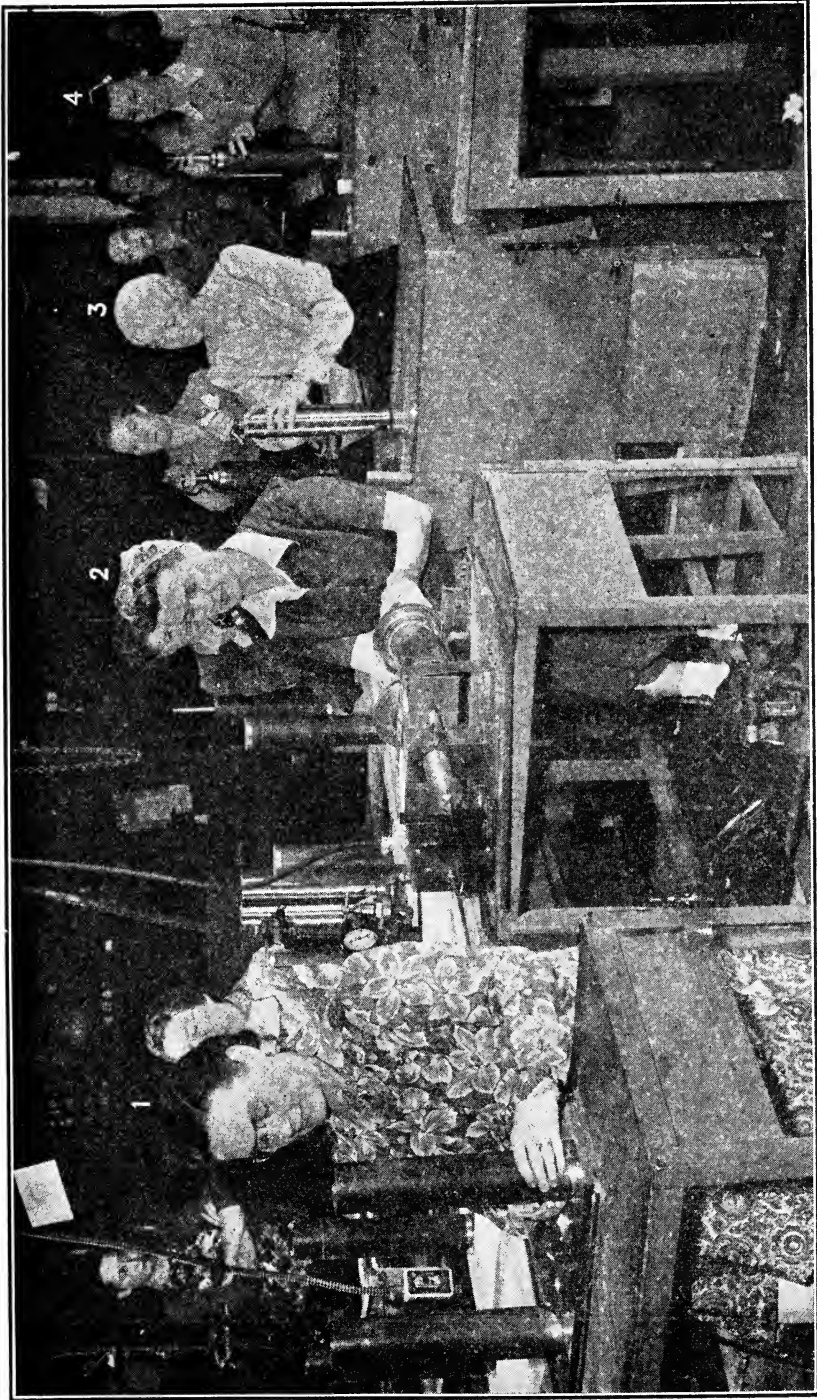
Inspection line for shell casings. The work moves along a belt conveyor and each operator inspects one particular dimension as follows: 1, Shoulder flange; 2, body diameter; 3, primer hole; 4, head thickness.
